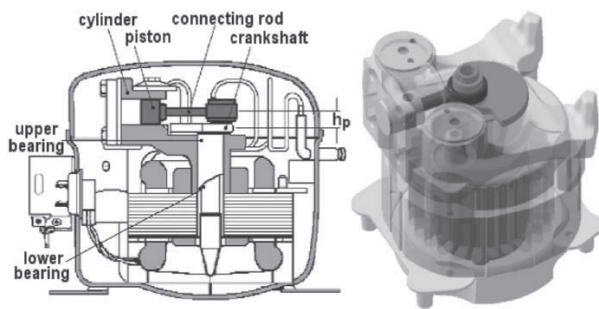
Schematic draw and general view of a hermetic reciprocating compressor.
